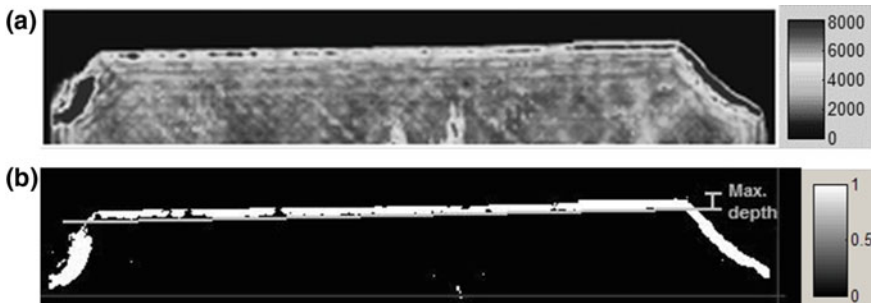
Evaluation of machining damage. Sample machined with C1 at 650 m/min, 0.10 mm/rev
